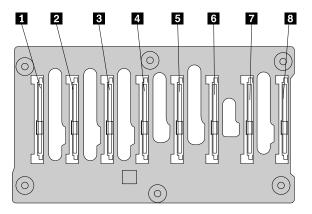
Front view of the 2.5-inch hot-swap hard-disk-drive backplane
